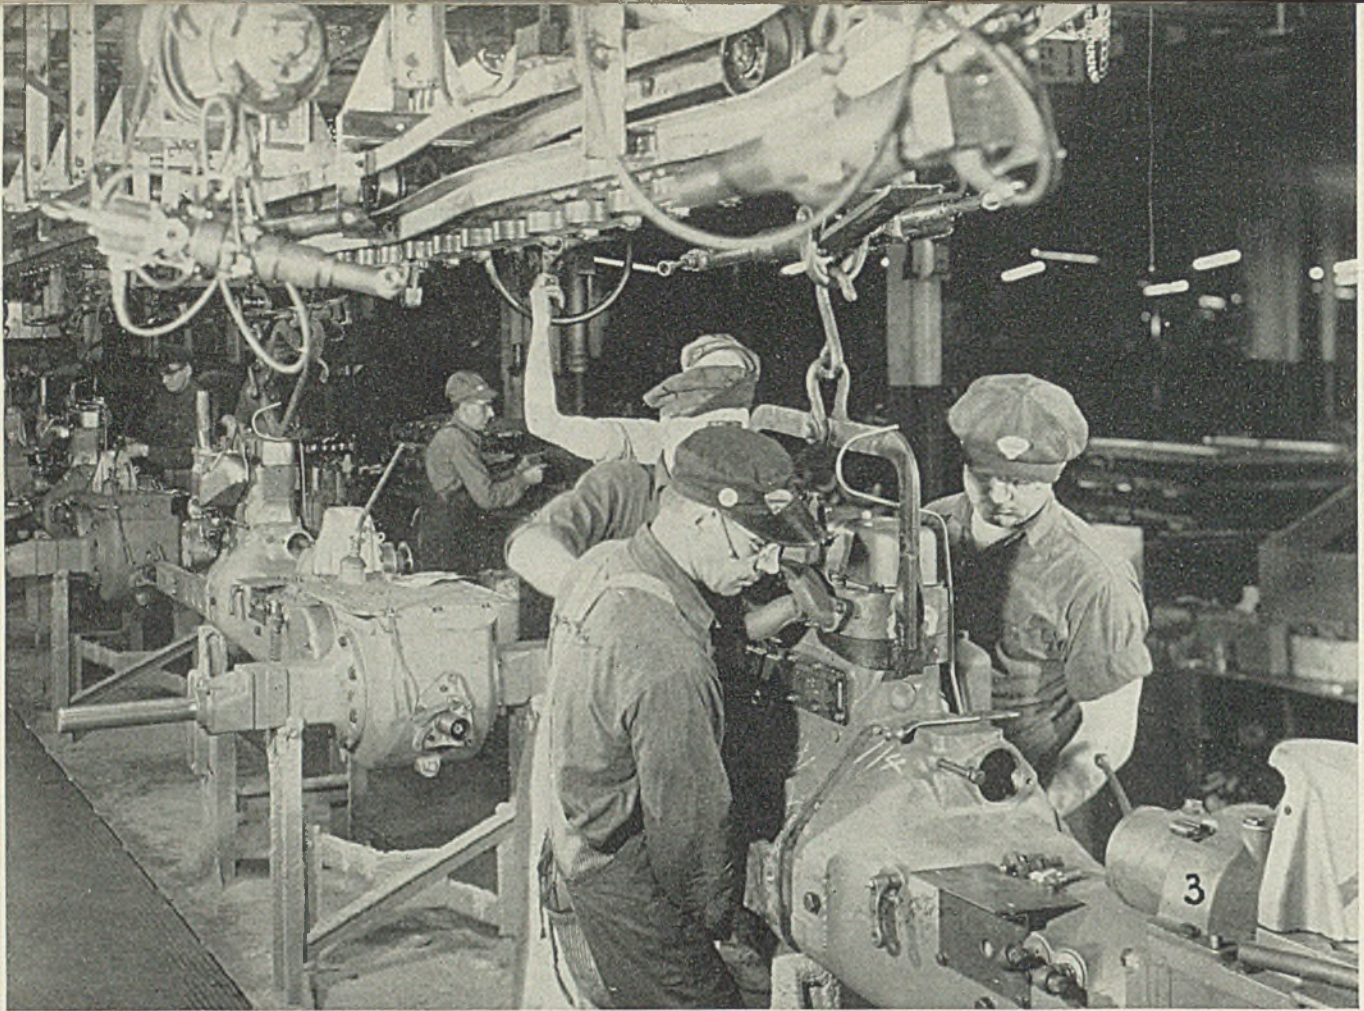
The engine drops from the overhead conveyor and is bolted to the main frame
